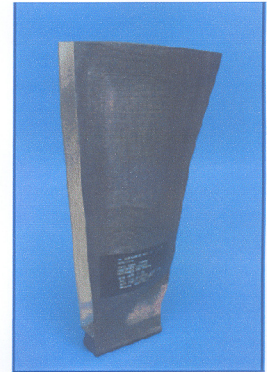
Pratt & Whitney 3D Woven Fan Blade Perform and Finished Resin Transfer Molded Blade-3
